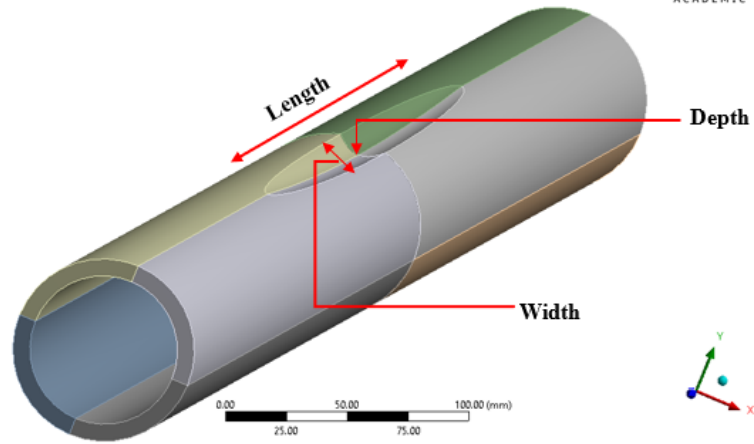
A u-shaped (scoop shaped) flawed tube.
